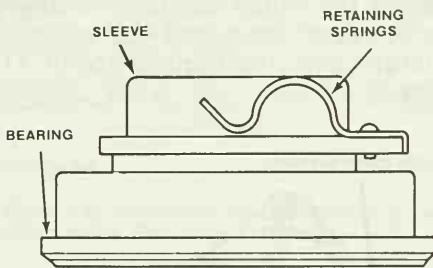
The release bearing is often mounted to the clutch fork with retaining springs. (American Motors Corporation)
